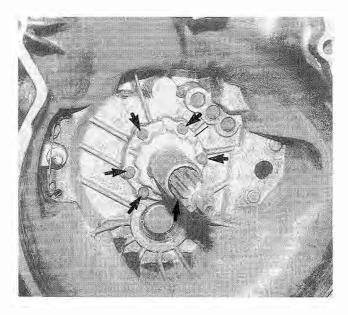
Guide sleeve bolts (arrows) to be removed. Getrag 240 transmission shown.
